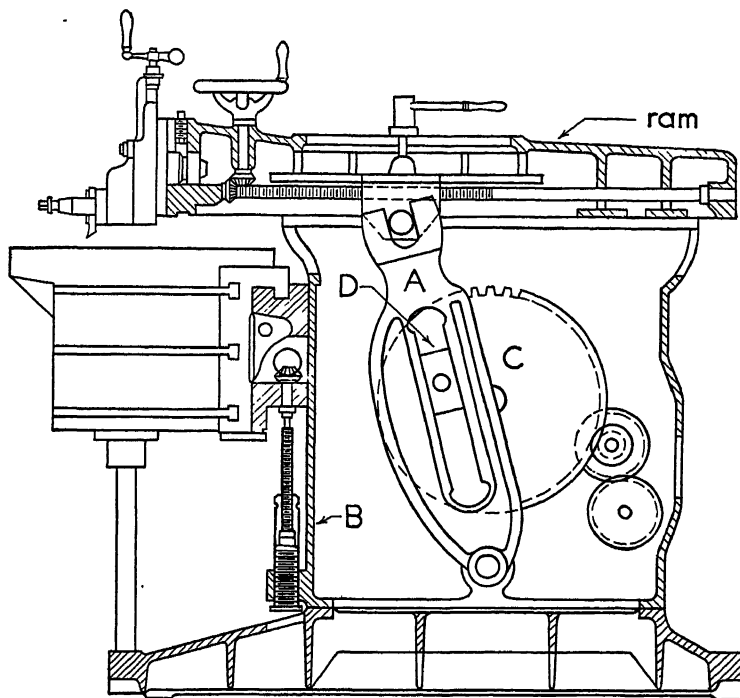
Sectional View of an Oscillating-Beam Shaper.
